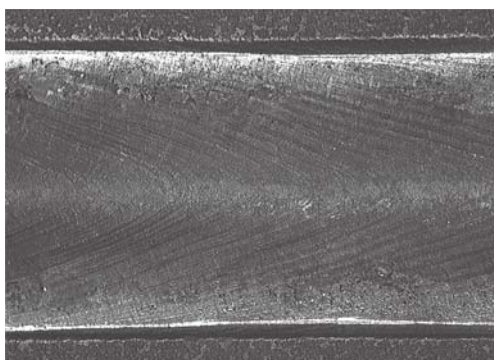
Typical high-speed TIG welded surface with very sharp ripples
